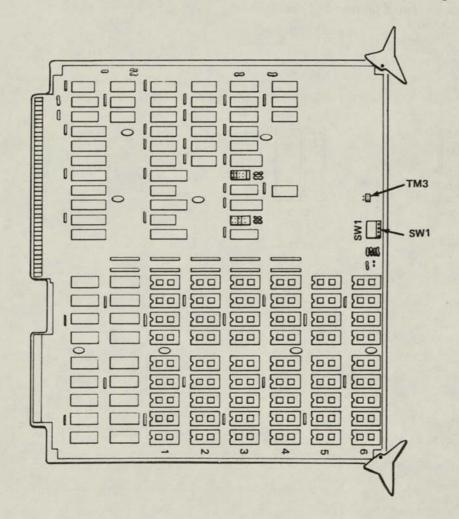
TM3 Jumper Location on the APC-H31 PCB Revision 1
